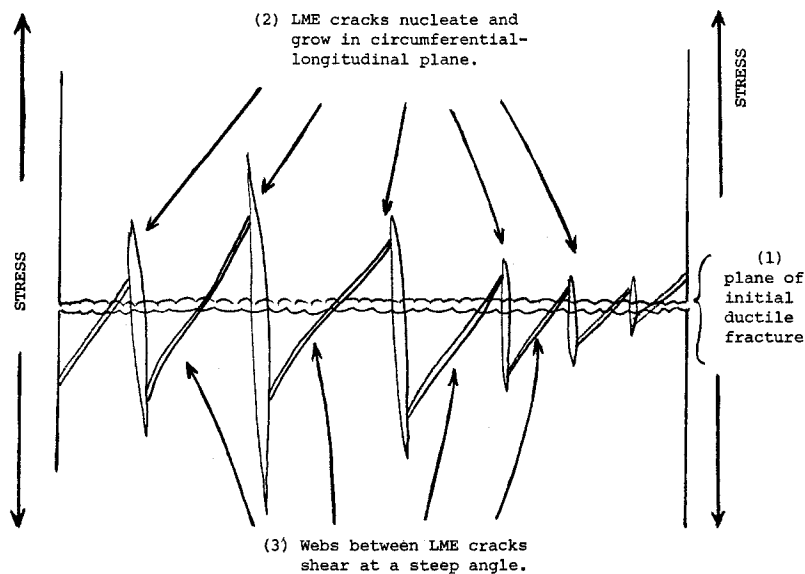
Proposed sequence of steps in the production of the highly serrated fracture surfaces in tubes H737 and H850.
